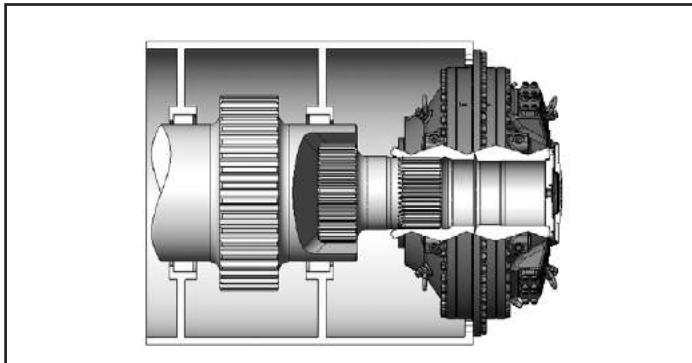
Flange mounted motor with splines and high radial load  $F_r$  on driven shaft.
